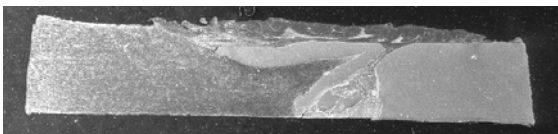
(a): Macrograph of weld produced at 1200 rpm and 50 mm/min
